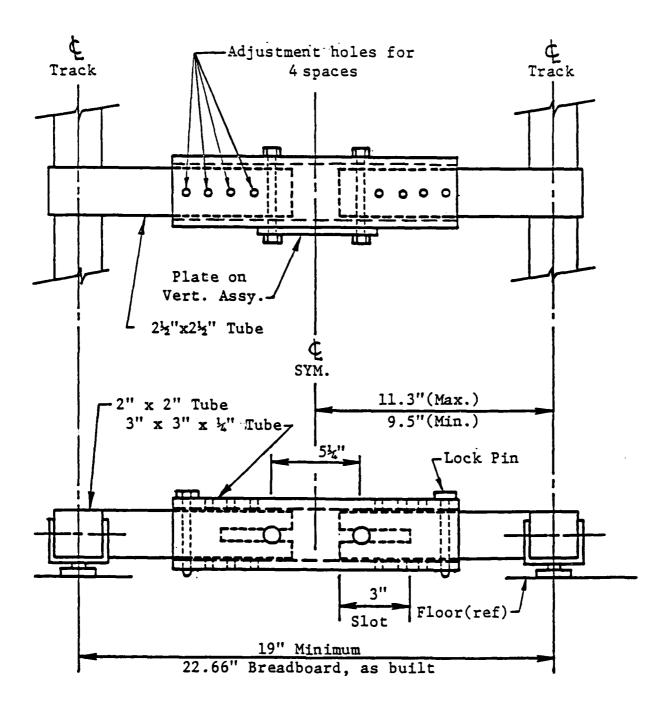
Simplest telescoping design of the horizontal frame assembly.
